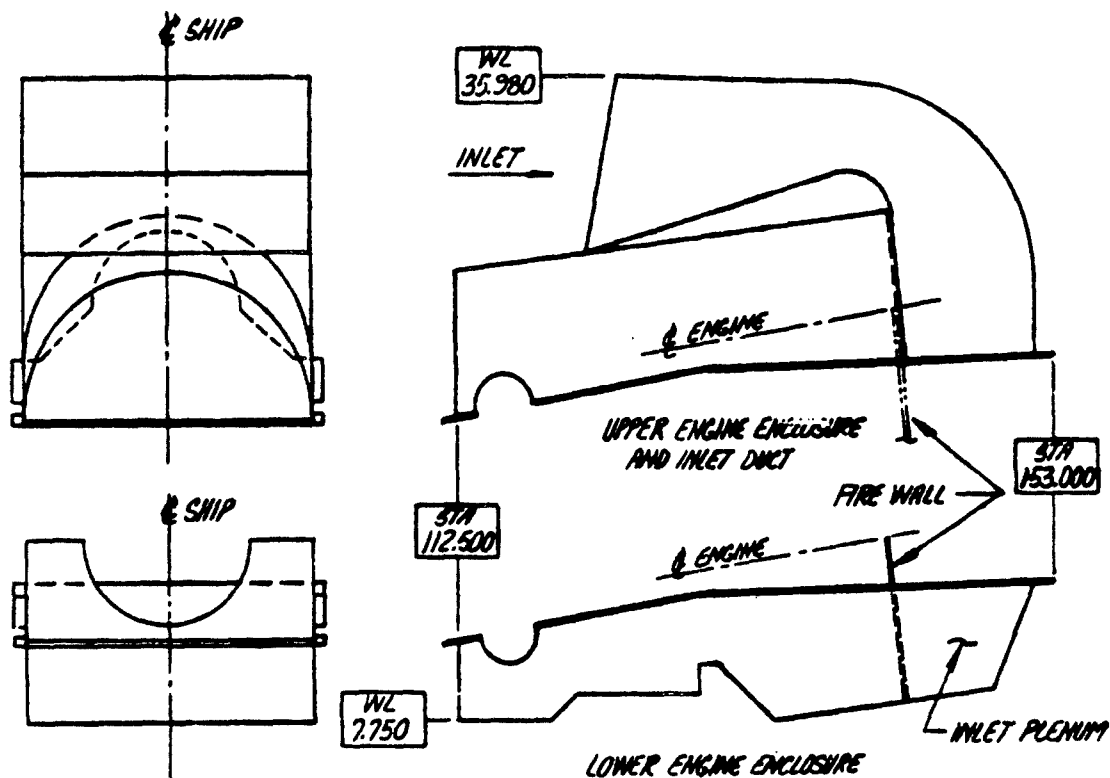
Fuselage Frame Assembly (Engine Access)
